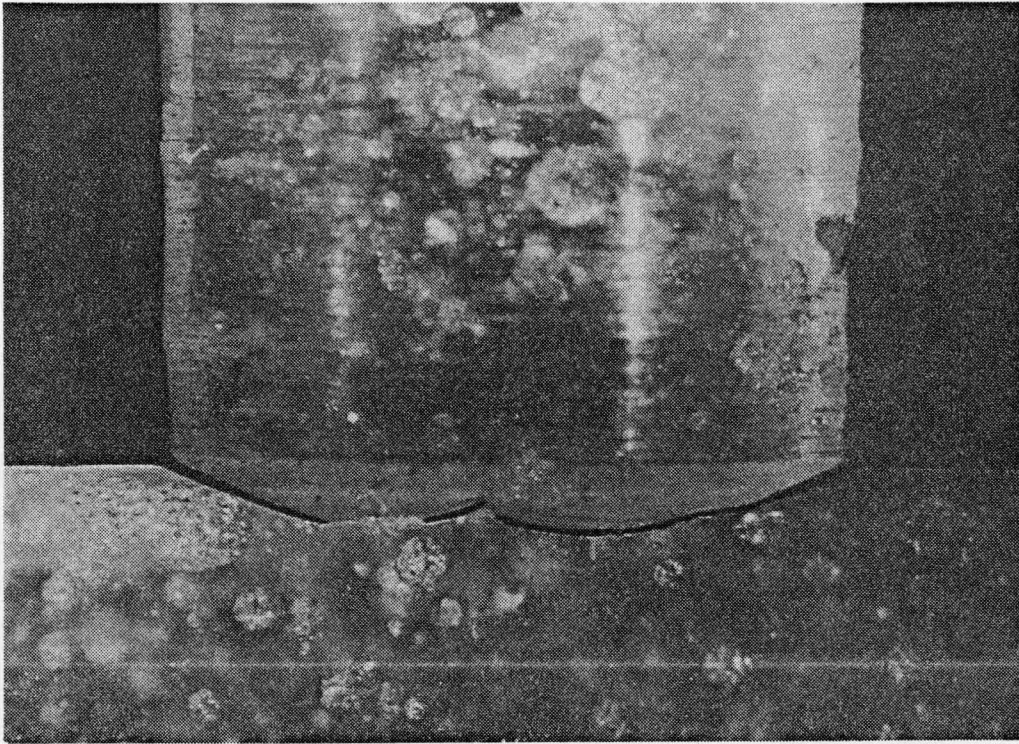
Tearing of Material Below Drill Point in 17-4PH (H900) Stainless Steel
